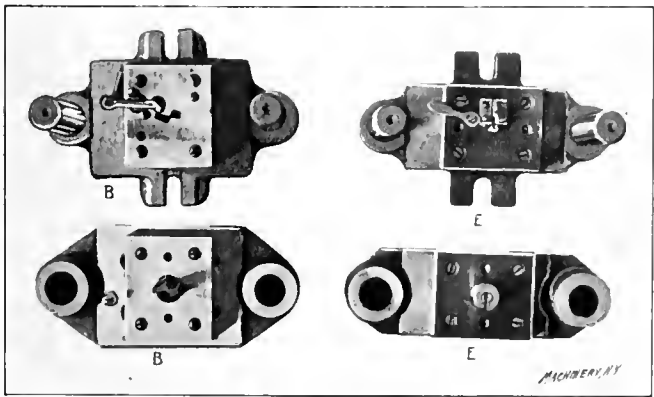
Sub-press Dies used for Stamping and Trimming Part in Fig. 1.
